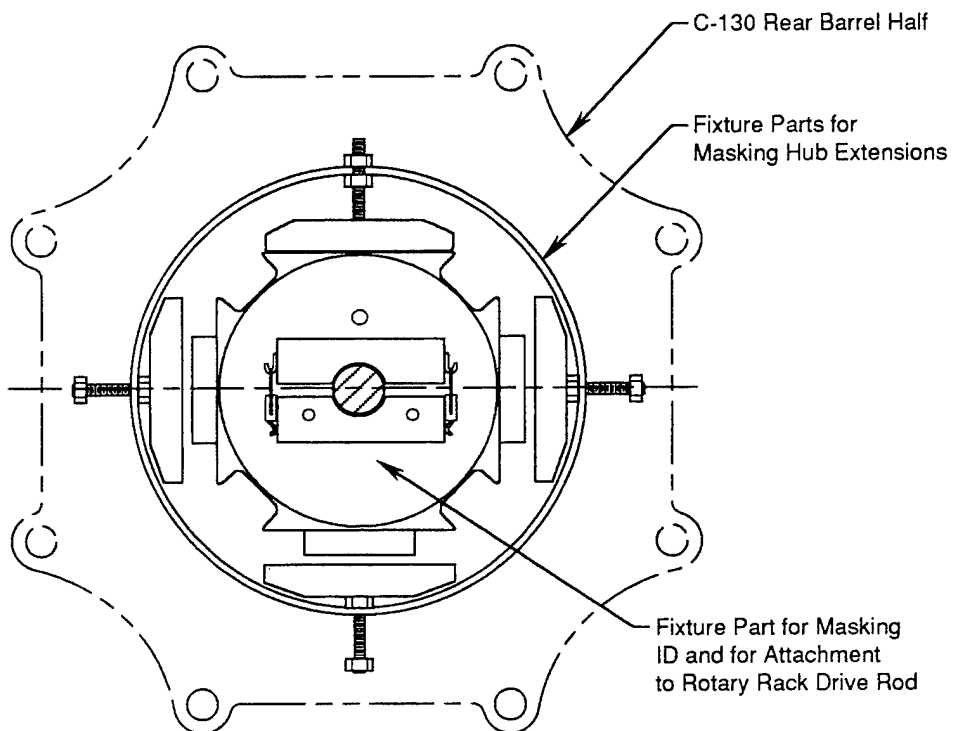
End View of Fixture/C-130 Propeller Rear Barrel Half Installed on the Rotary Rack.
